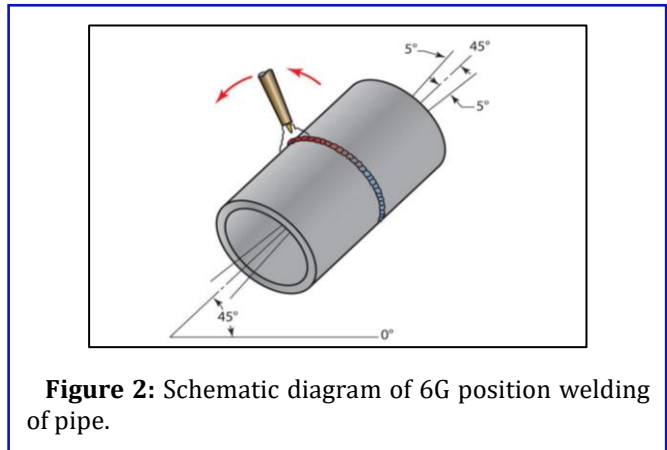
Schematic diagram of 6G position welding of pipe.
